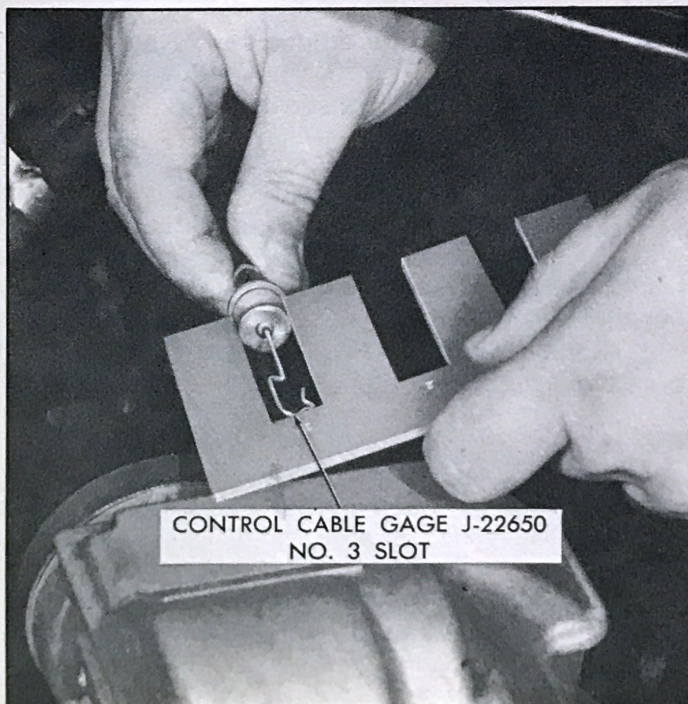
Control Cable Check (All Except 693 Styles)
